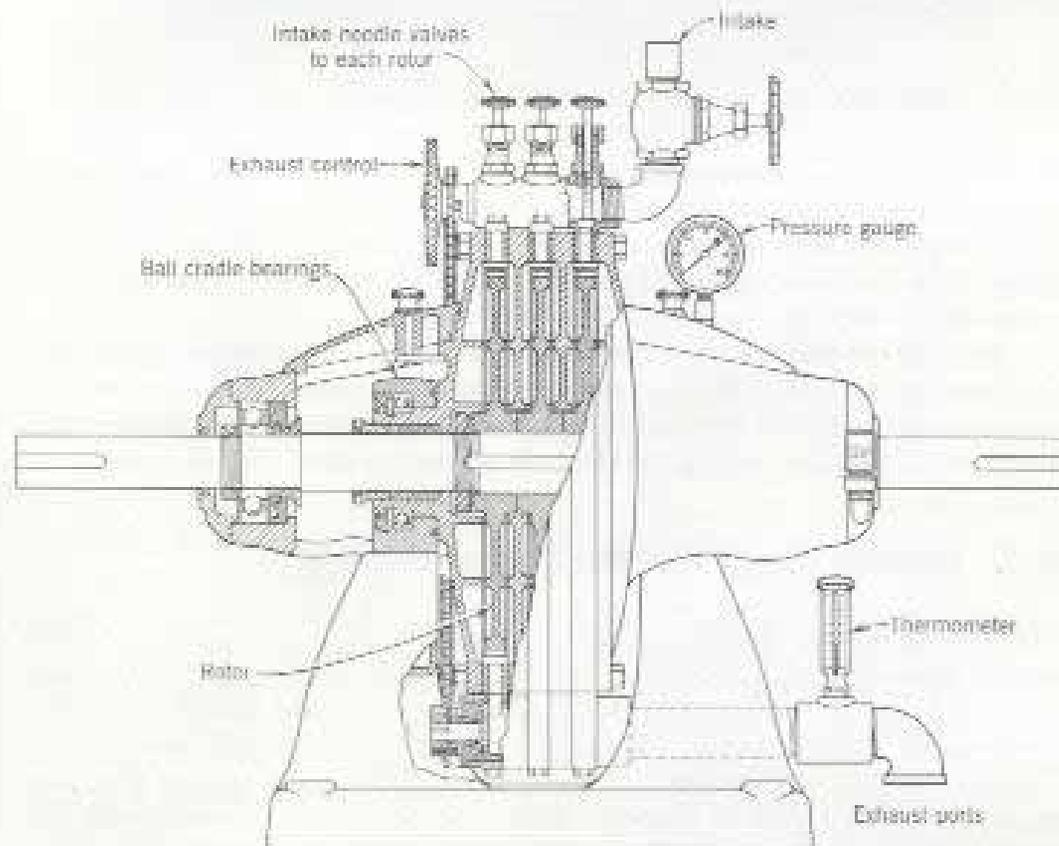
Hydraulic dynamometer. (Courtesy of Taylor Dynamometer and Machine Co.)
